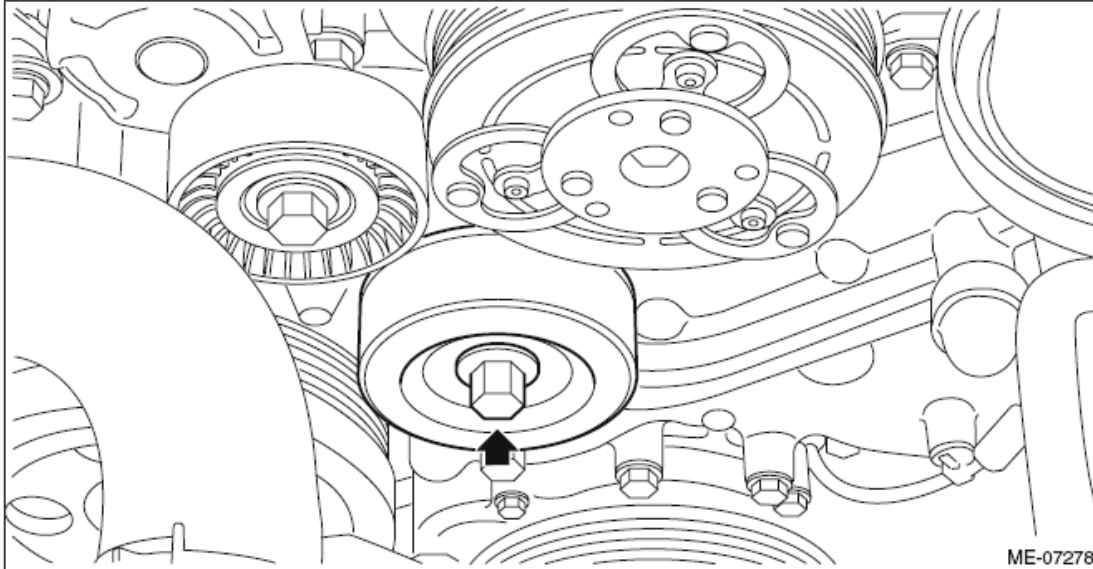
Locating Idler Pulley To Chain Cover Bolt
